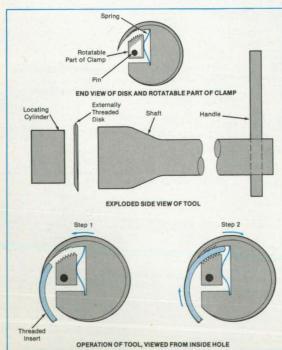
The Tool Threads into the Hole, pries the insert loose, grips the insert, then pulls the insert to thread it out of the hole.
